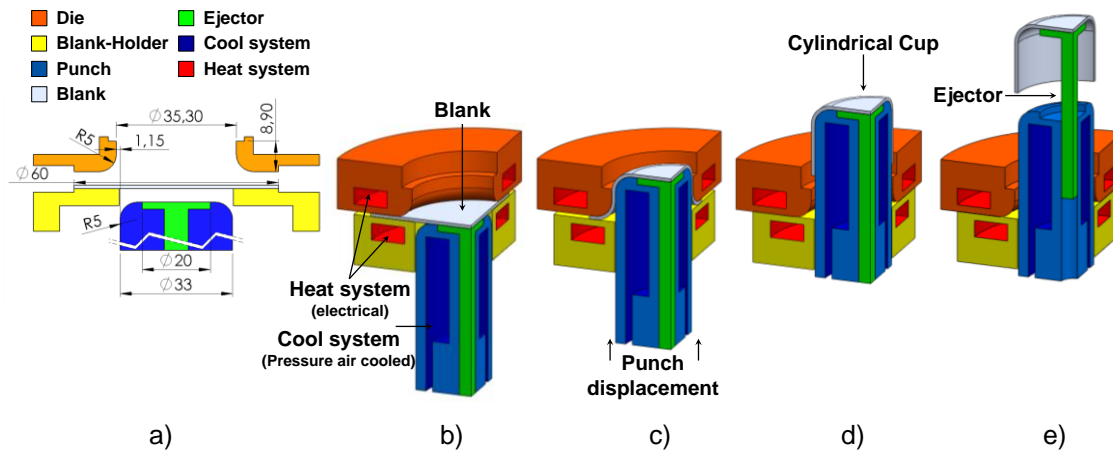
Drawing of a cylindrical cup: a) Tools dimensions (in mm); b) Initial position; c) Cup drawing; d) Punch final position; and e) Ejection step.
